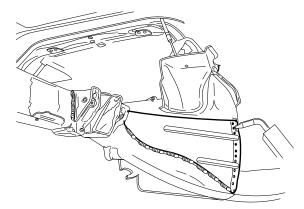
Plug Weld New Panel to 1" Flange Created During Removal
